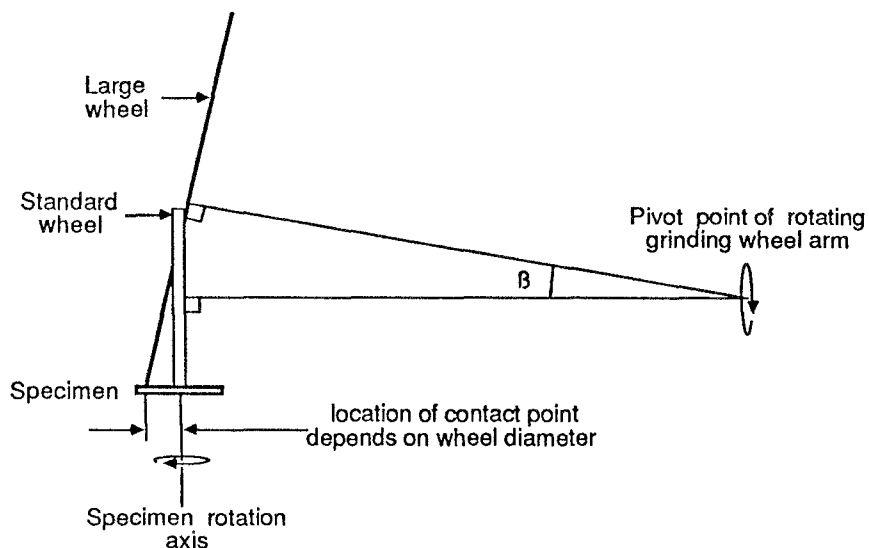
Illustrating why grinding wheel rotation axis should not be tilted
